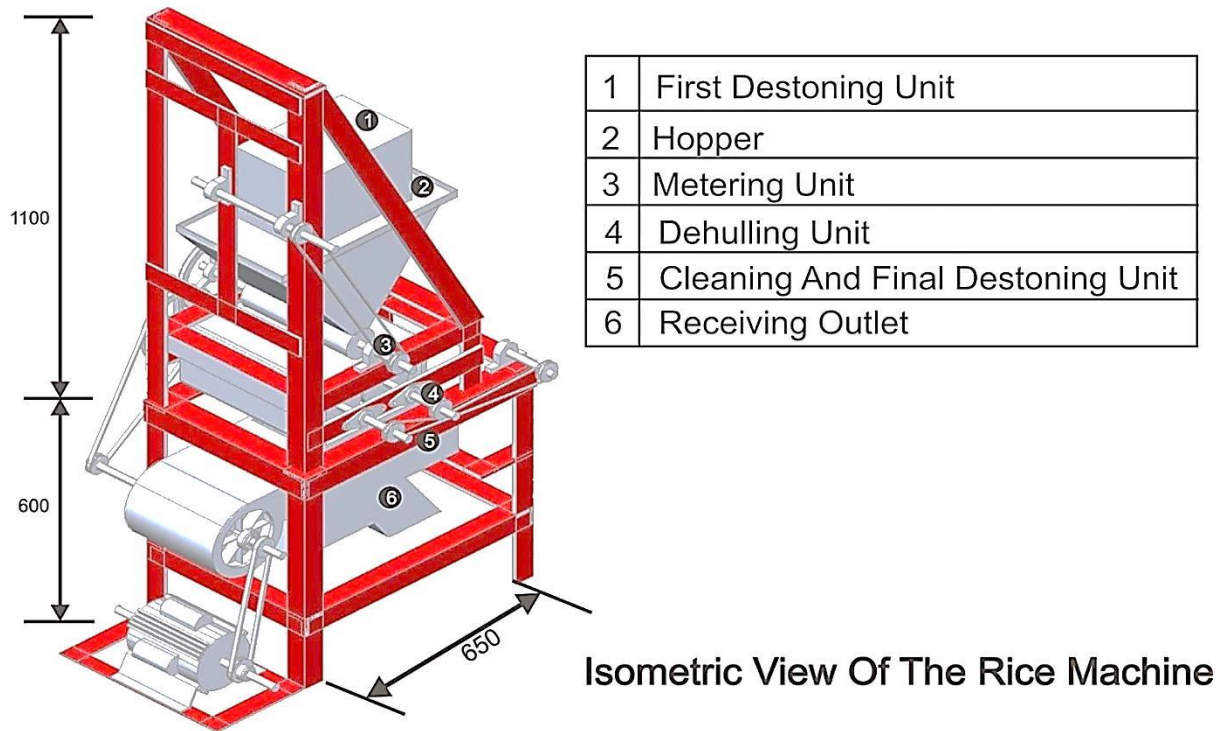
Second prototype rice dehusking / destoning machine with Teflon rollers.
